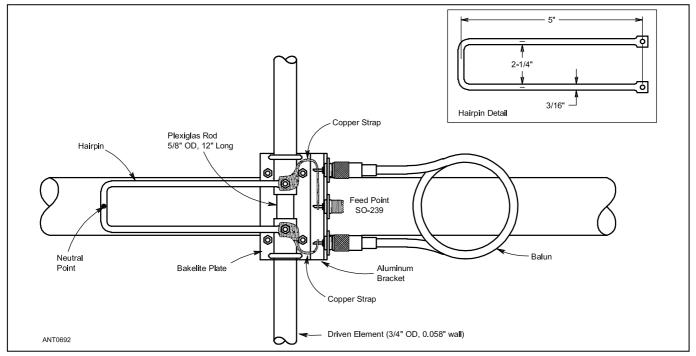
This shows how the driven element and feed system are attached to the boom. The phasing line is coiled and taped to the boom. The center of the hairpin loop may be connected to the boom electrically and mechanically if desired. Phasing-line lengths:
